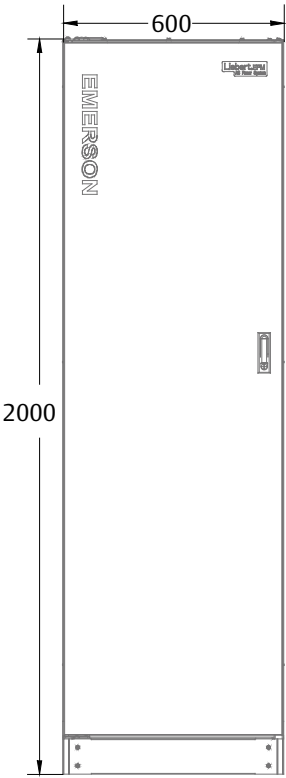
Front dimension of BCB cabinet (unit: mm)
